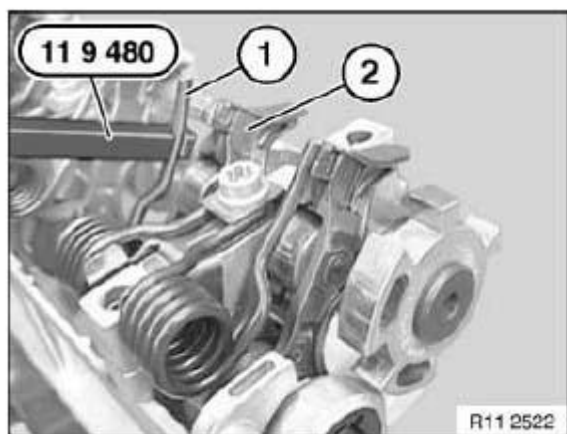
Identifying Torsion Spring And Intermediate Lever
